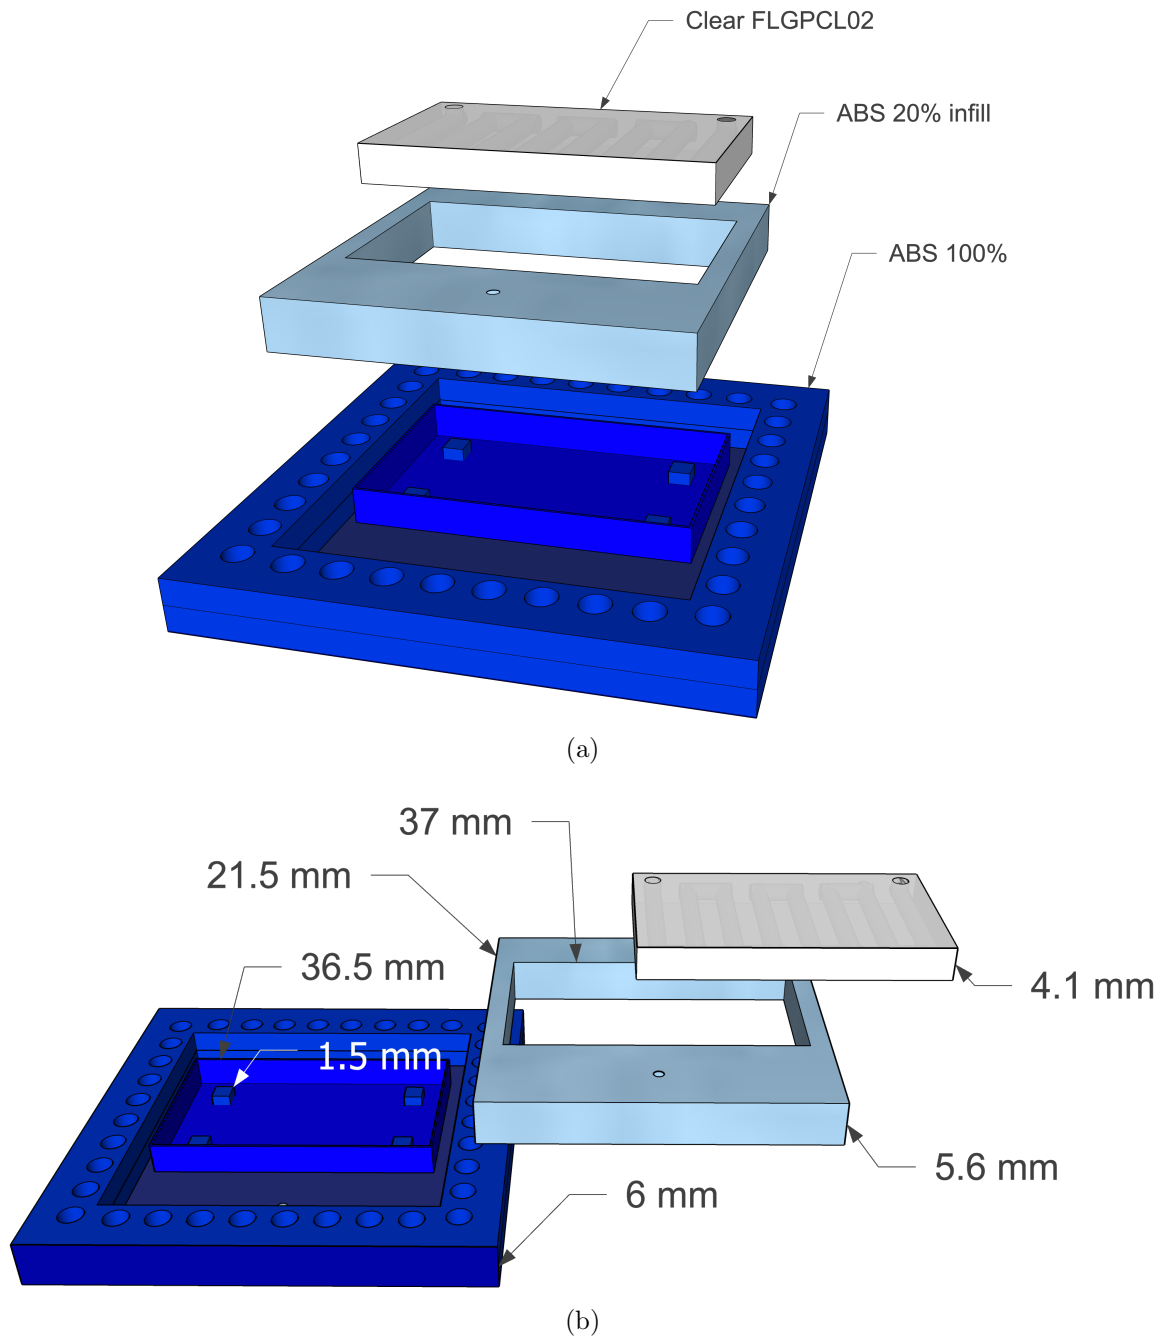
3D exploded side views of the first sensor prototype: (a) with the different material that make it up indicated; (b) with cavity inner dimensions reported.
